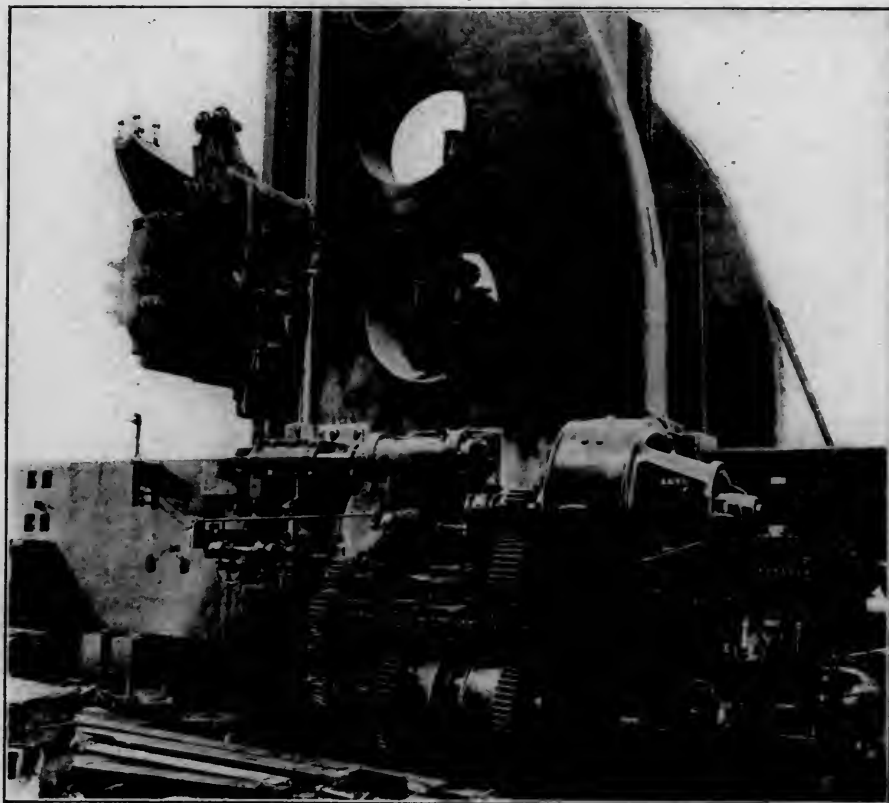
SIDE VIEW SHOWING THE MAIN DRIVE.
